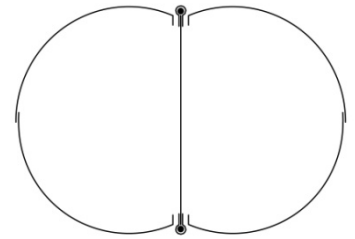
EXTRA WELDING ON THE HULL
